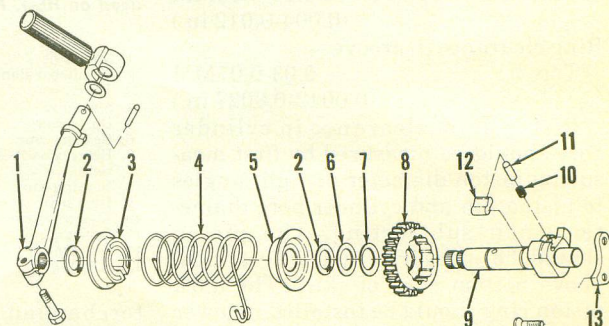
Exploded view of kickstarter assembly used on YL-1 models.
